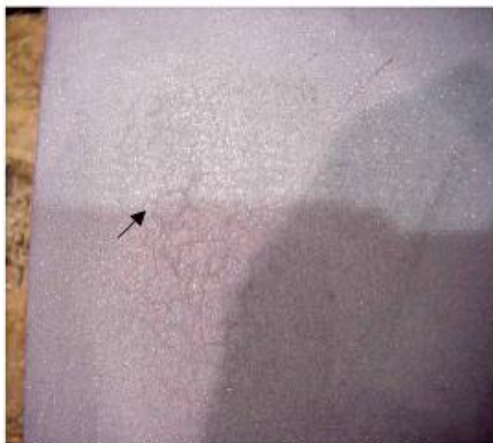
Typical craze cracking on the Siemens V84.2, Row 2 vane.
